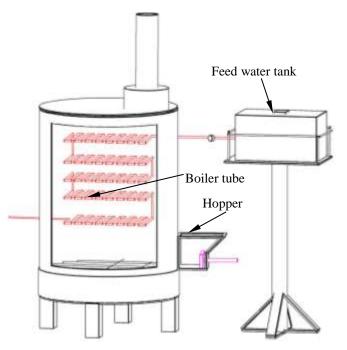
Sectional view of the fixed grate incinerator with stepped boiler tube.
